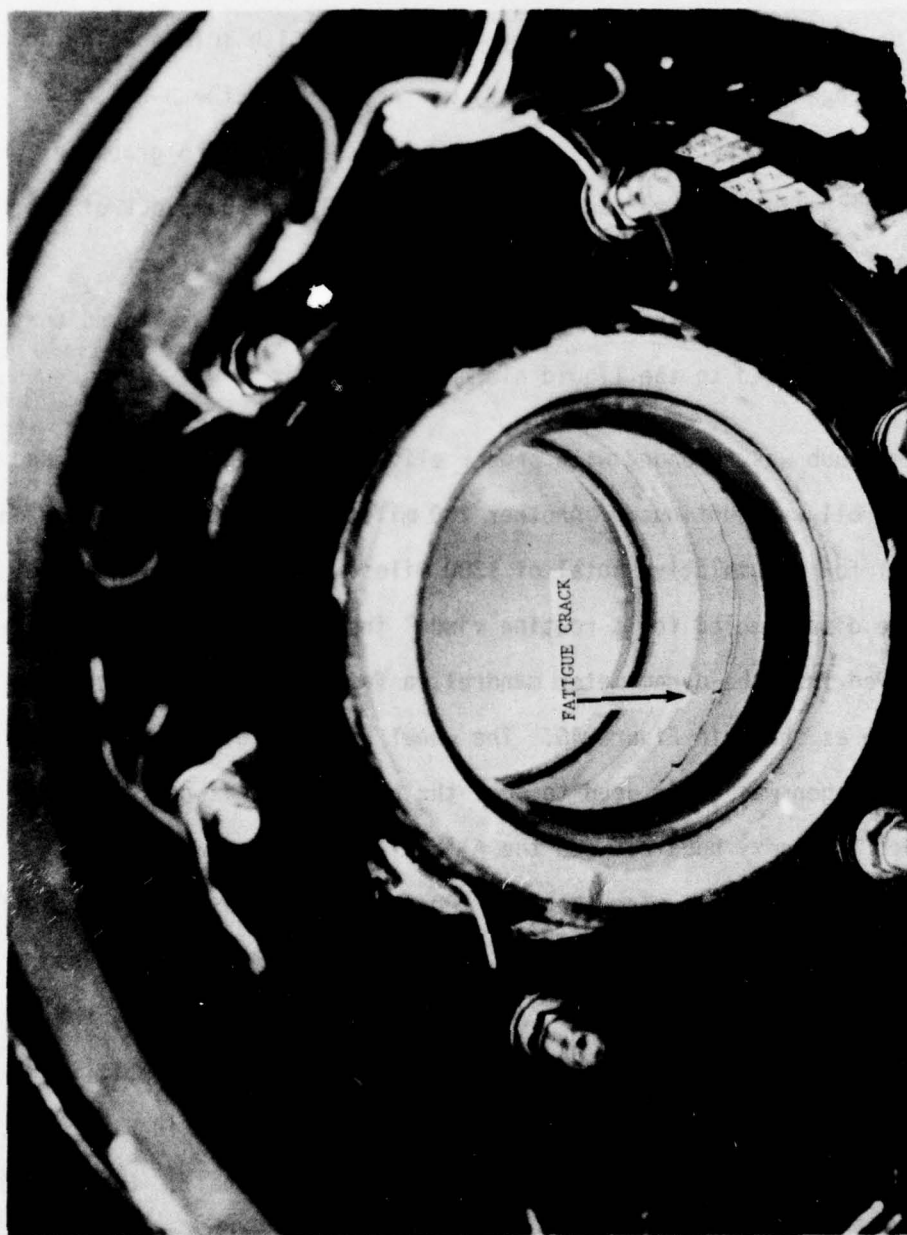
Fatigue Crack in AL Hub After 1300 Miles of Straight Roll
